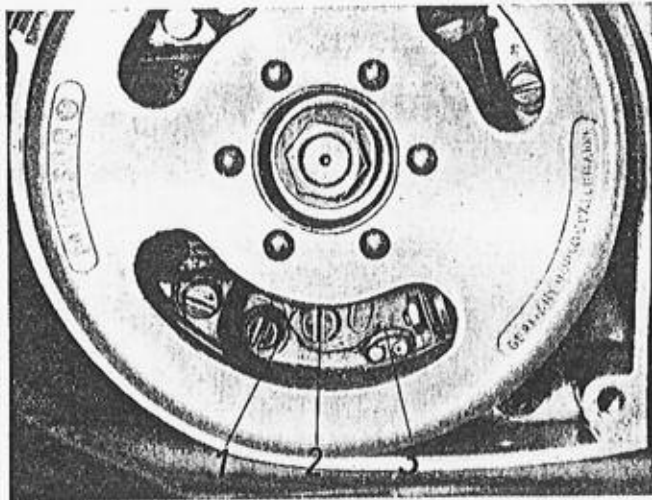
Adjustment of the SACHS 50 Contact Breaker
